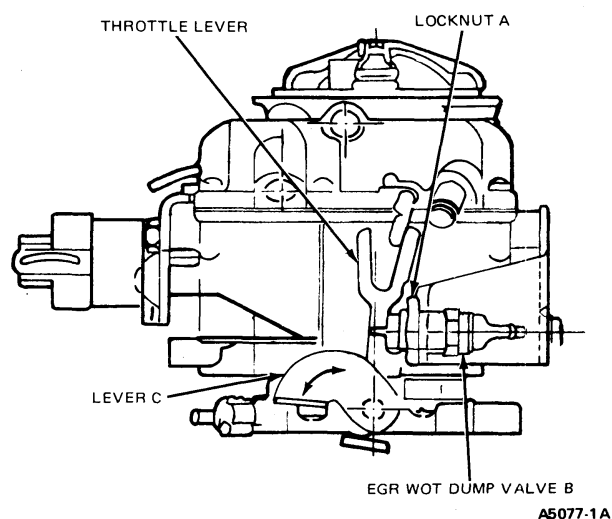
YFA Carburetor—EGR WOT Dump Valve Adjustment
